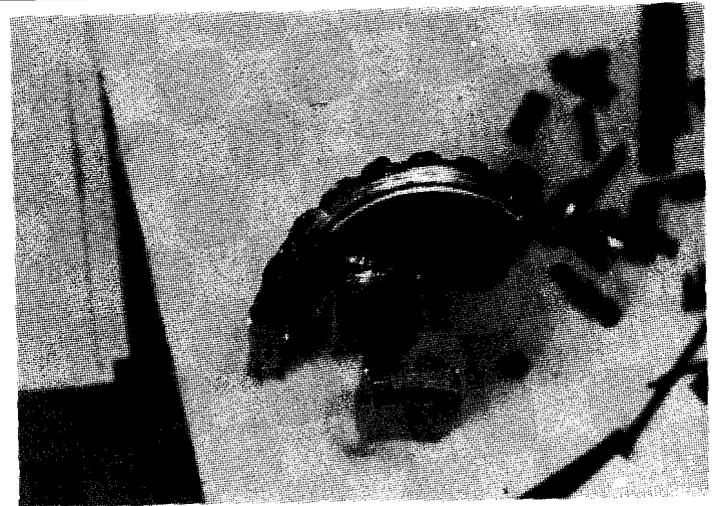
Fragments of Disintegrated Pinion Gear Showing Fatigue Cracks
